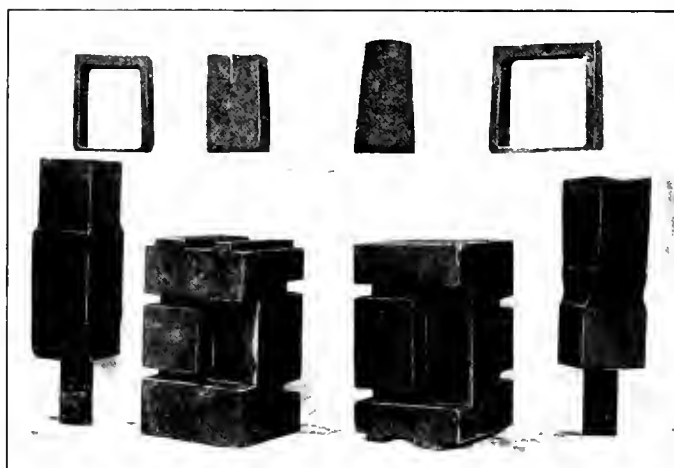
DIES AND HEADERS FOR FORGING SPRING BANDS.
